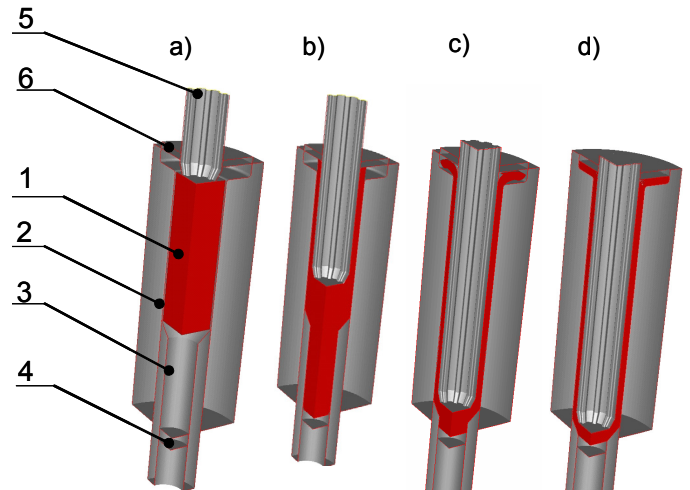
The method of complex extrusion of the internal tothing flanged spline sleeve 1. stock, 2. container, 3. movable die, 4. mandrel, 5. punch, 6. die
